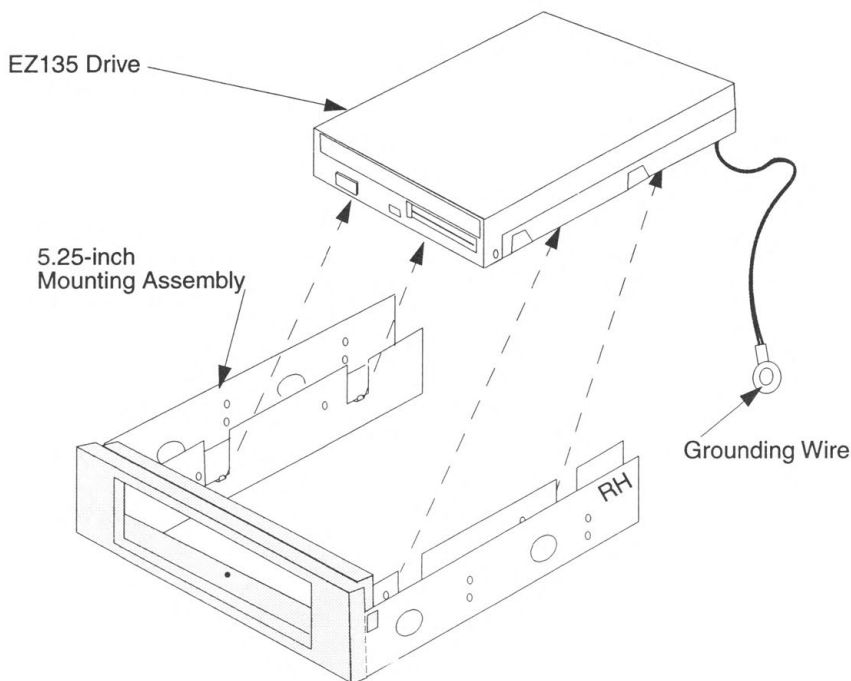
Place the EZ135 drive on to the Mounting Assembly (3.5-inch Bays Only)
